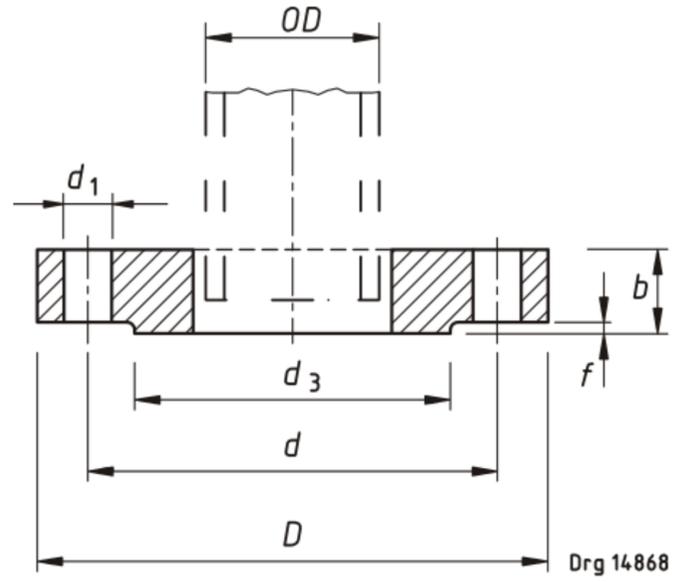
(c) —Type 3: Steel plate flange for welding
